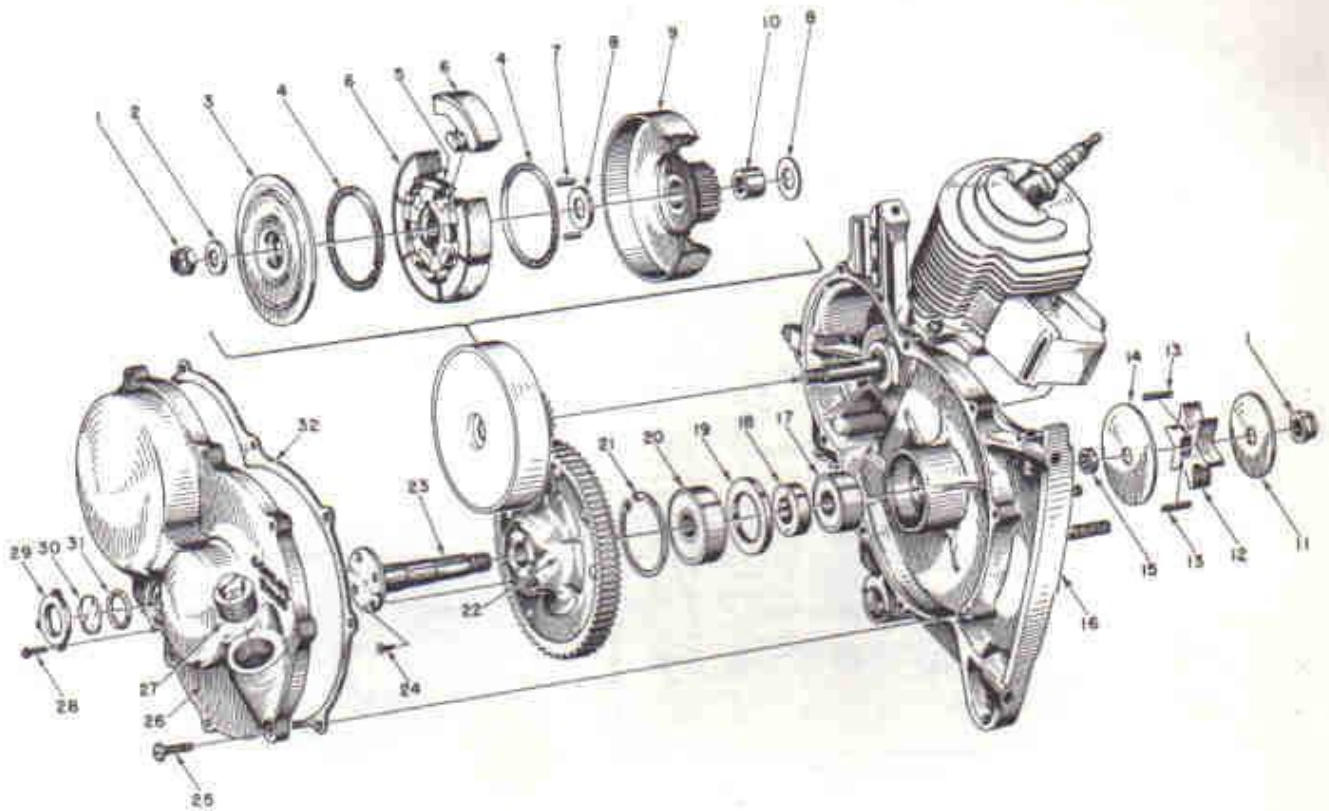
GEAR CASE AND SPROCKET PARTS
